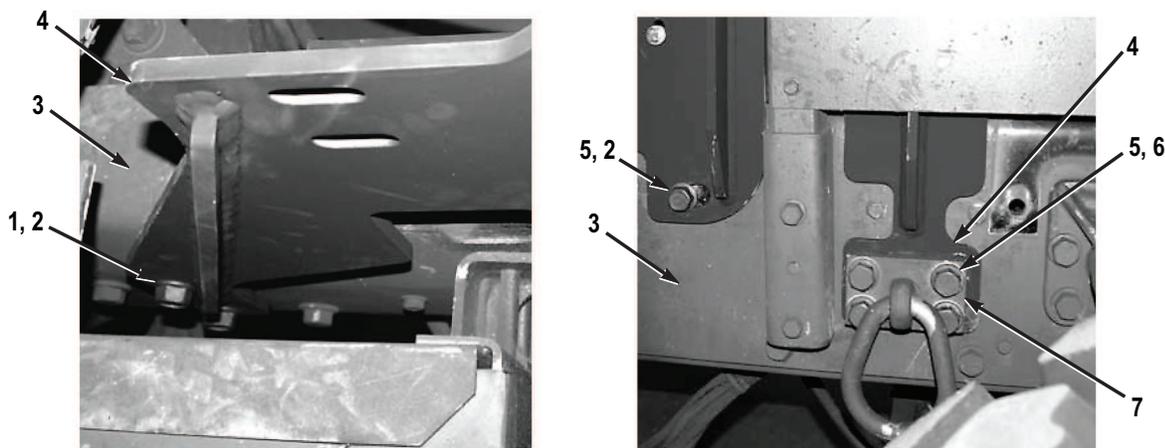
HEMTT A4 Passenger Side Stowage Mounting Bracket.
